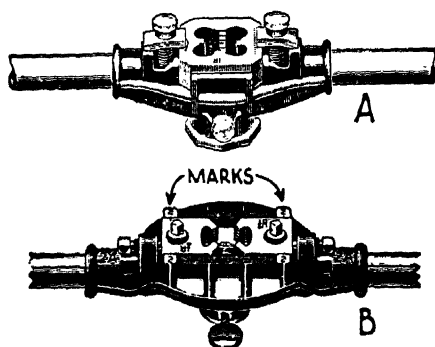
Pipe-threading stocks and dies. A, stock with one-piece die; B, stock with two-piece dies or adjustable dies
